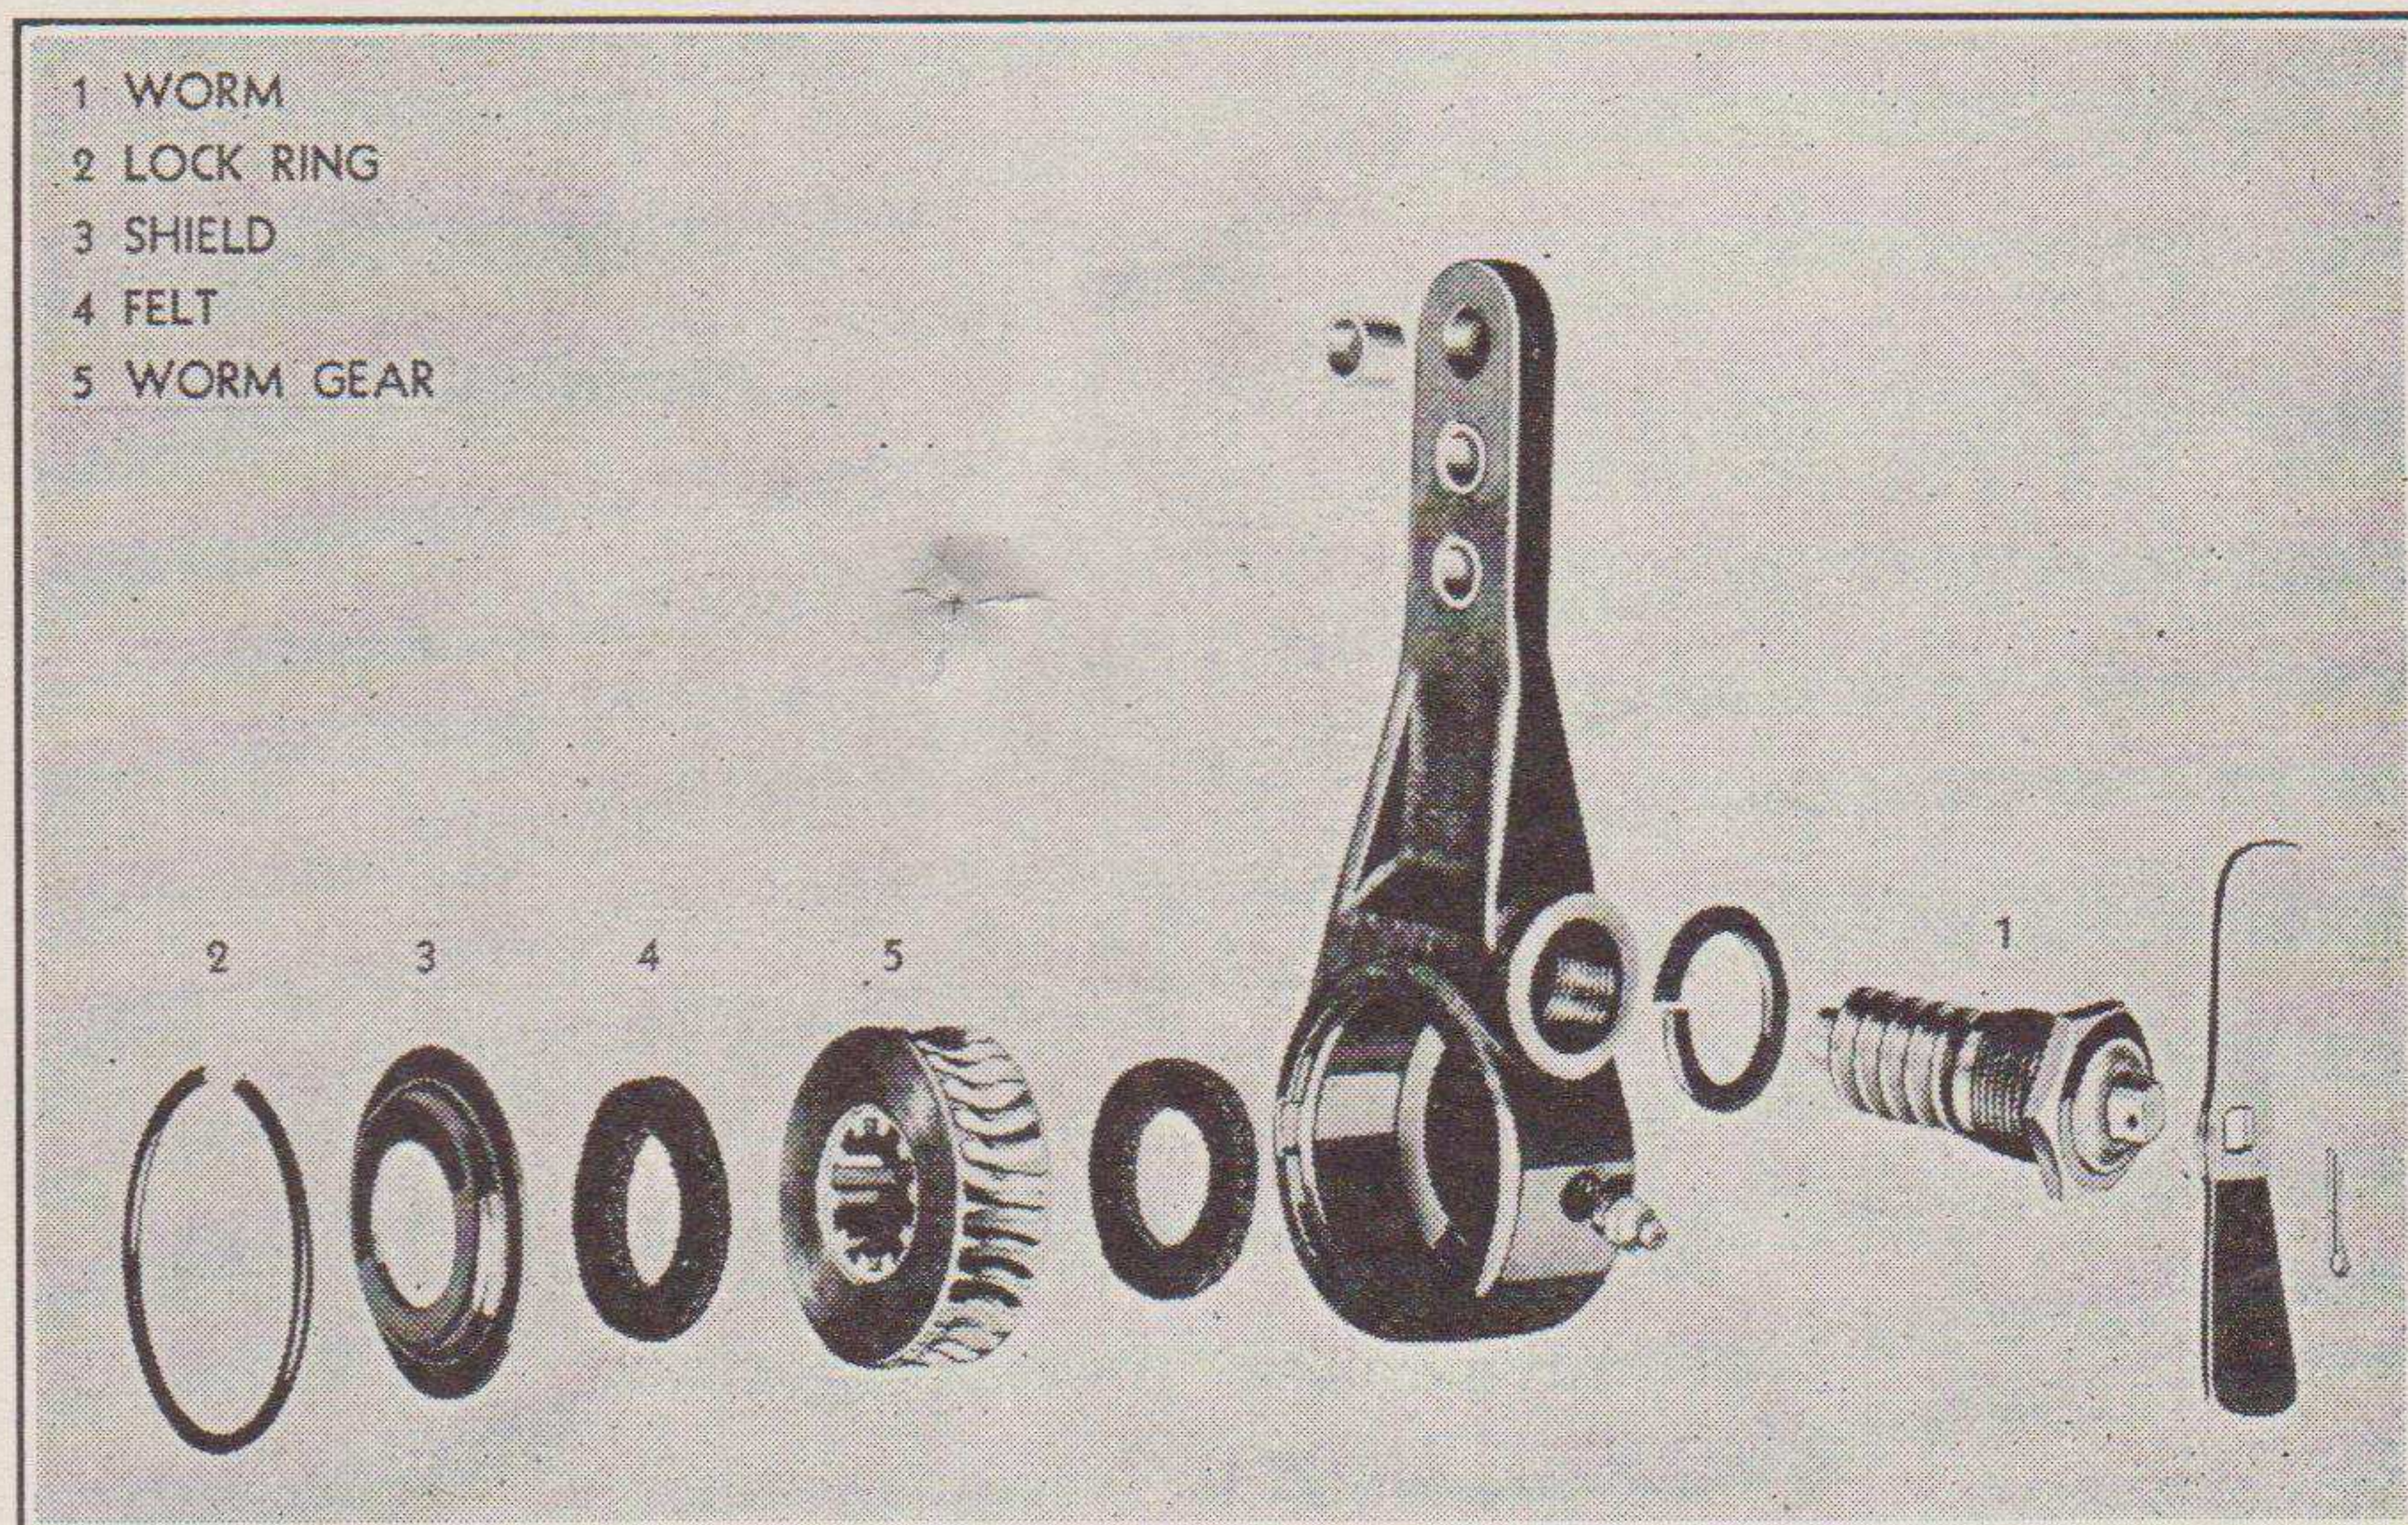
SLACK ADJUSTER ASSEMBLY
